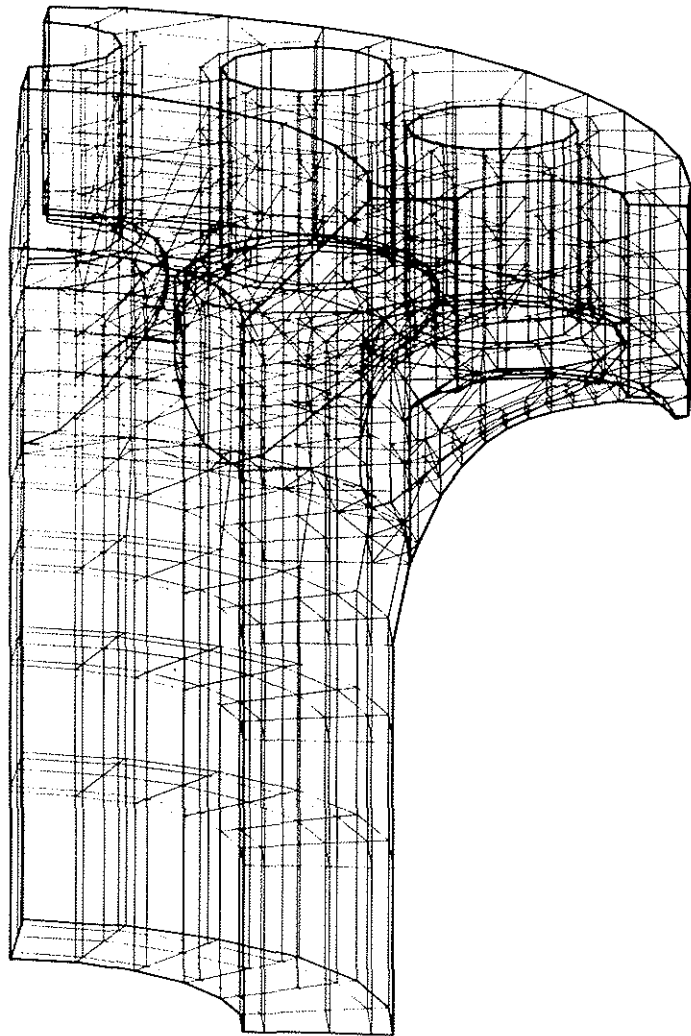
Idealisation of a  $90^{\circ}$ -Section of the Rotor Shaft Flange
